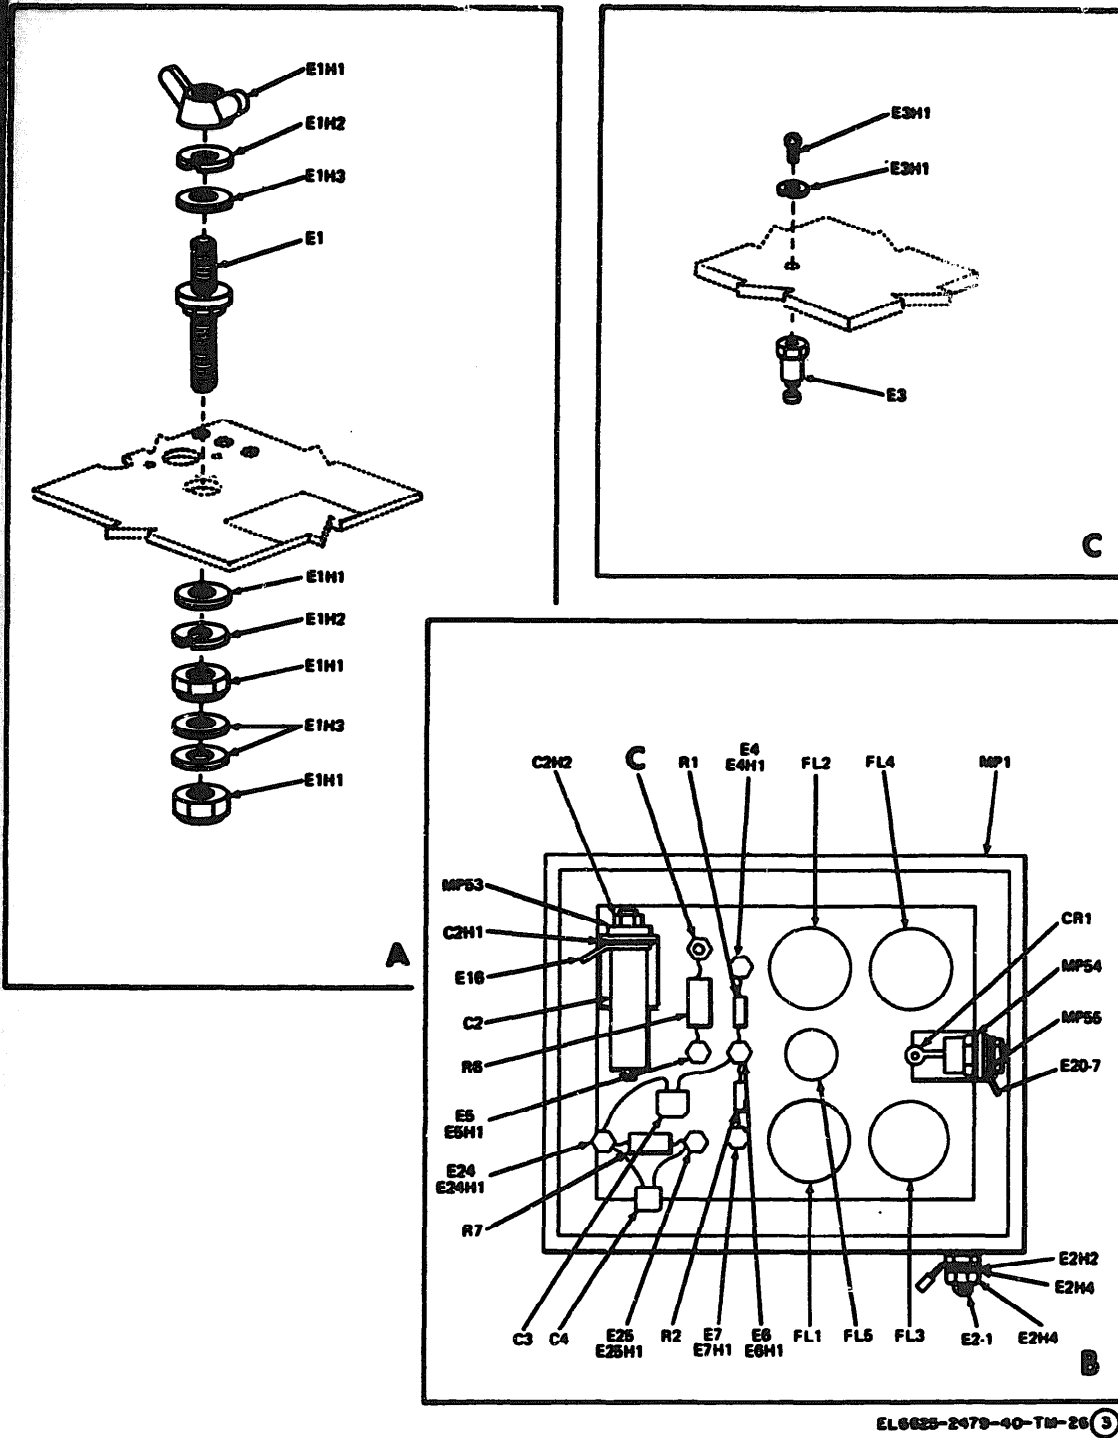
3. Panel assembly 1A3, parts location (part 3 of 5).
